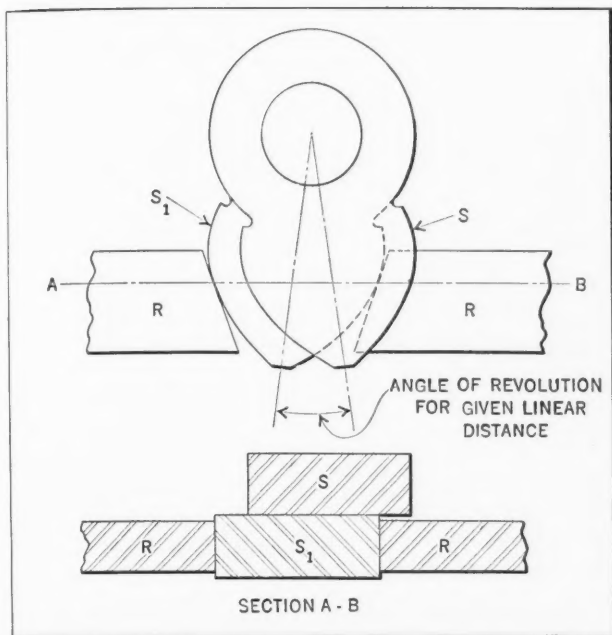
Diagram that Illustrates the Manner in which Stepped Master Involute Gages are Used for Checking Helix Angles and Involute Profiles
